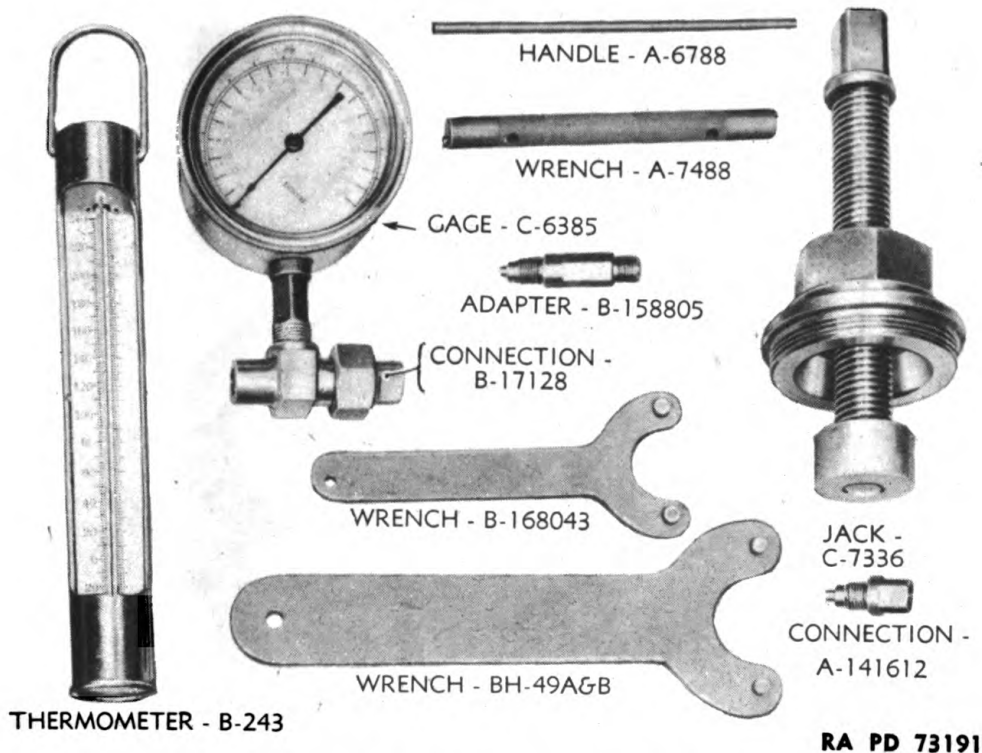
Tools for Recoil and Equilibrator Mechanisms
